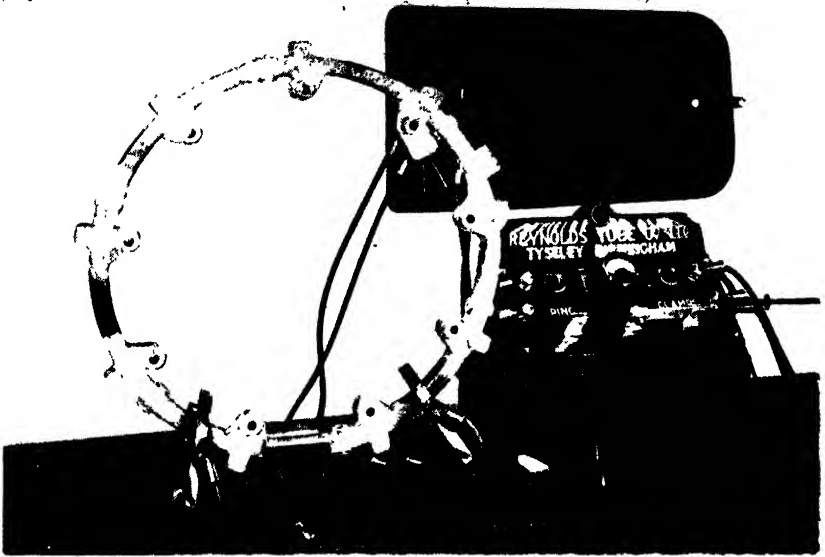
THE REYNOLDS CRACK DETECTING EQUIPMENT
